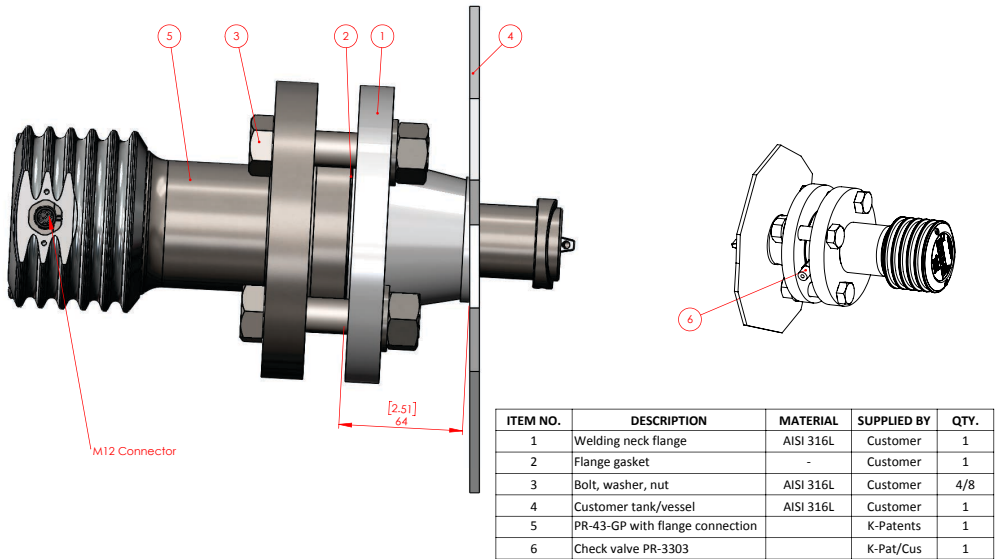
Mounting PR-43-GP to a tank or vessel
